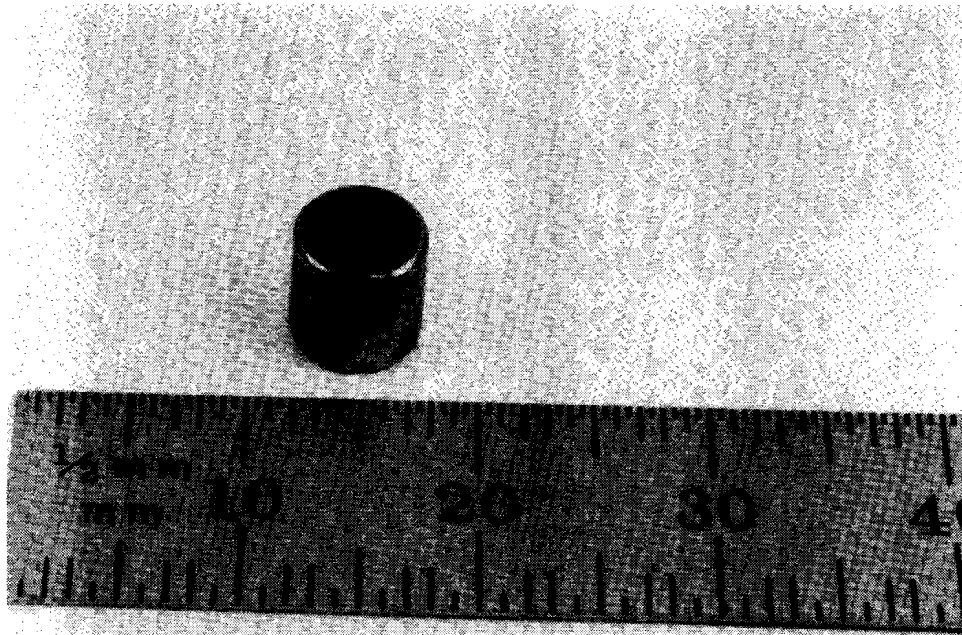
90-Degree Gearbox -409 Bearing Roller C/D Fault, Runs 7A + 7B
